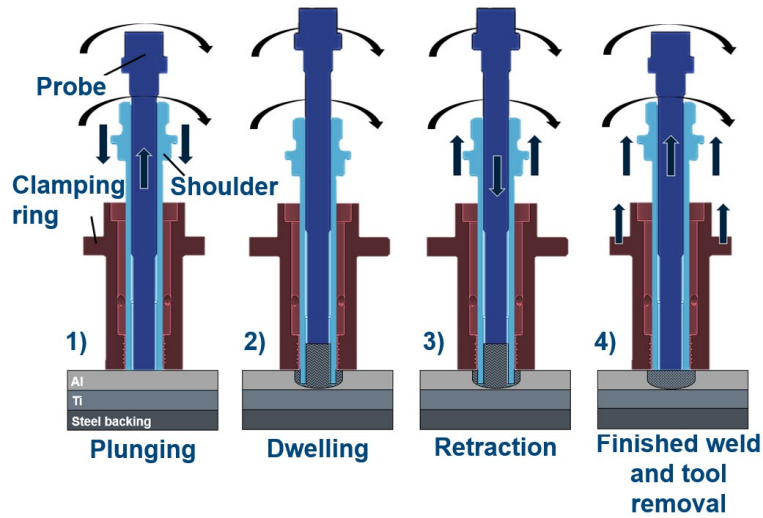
Schematic illustration of the refill FSSW process, showing the tool components, sheet orientation and process stages: 1) Plunging phase, 2) Dwelling phase, 3) Retraction phase, 4) Tool removal.
